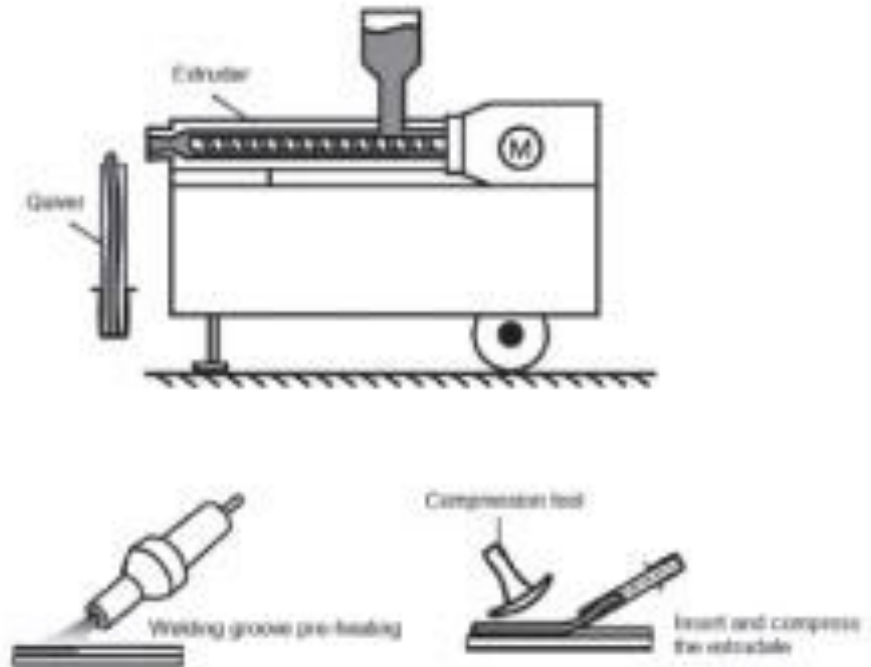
Schematic diagram for discontinuous welding with machine variant II.
